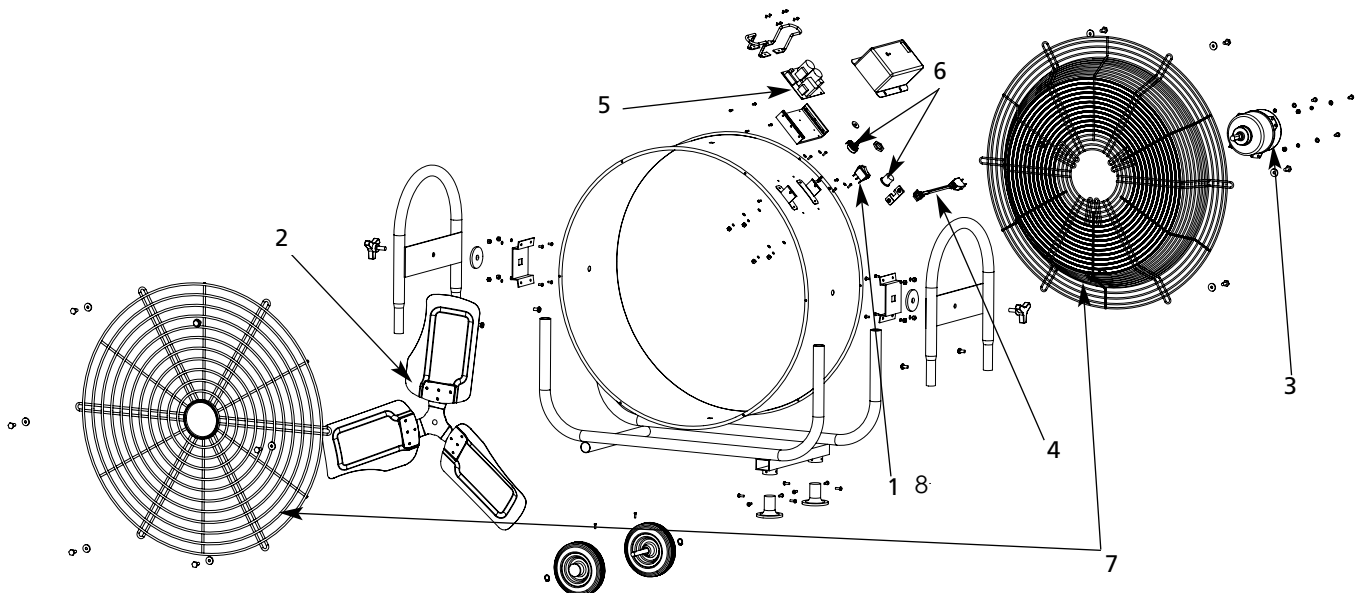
Repair Parts Illustration for BLDC Mobile Air Circulator 31XL41
